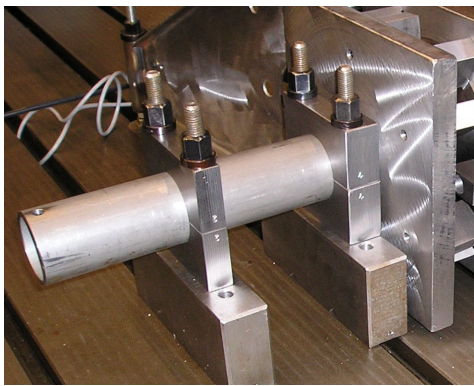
The fixation of the shaft on the side of the fixed pulley halve
